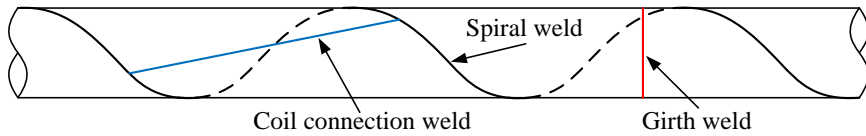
Schematic overview of spiral weld, coil connection weld and girth weld in a spiral-welded tube.
